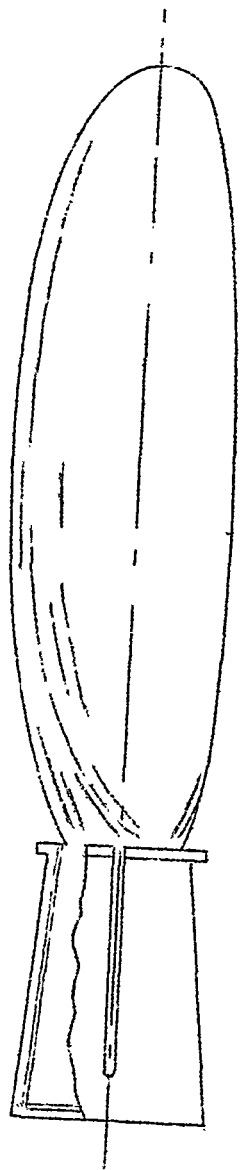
Split steel sleeve compressed about butt end of propeller blade.
